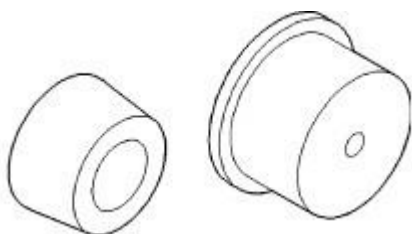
Rear Crankshaft Oil Seal Installer 6926
